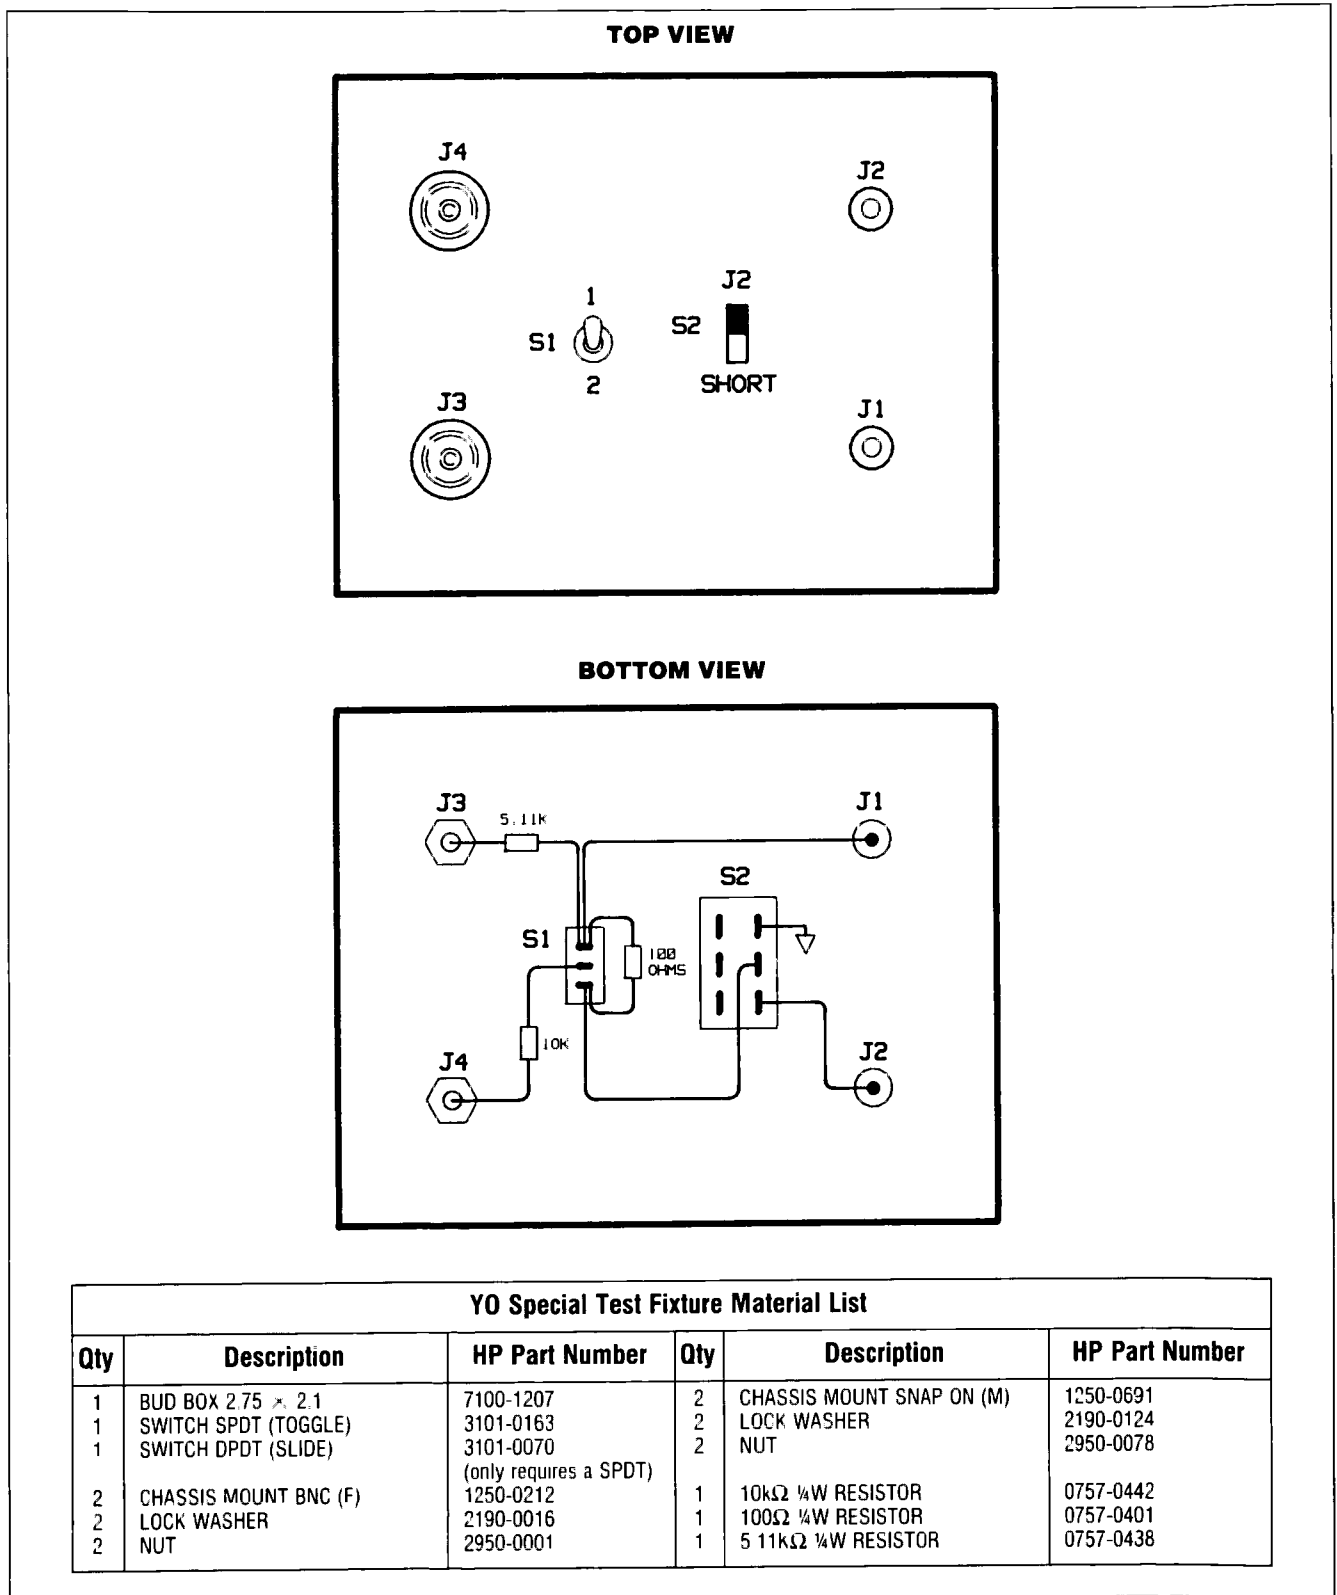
Special Test Fixture Fabrication Instructions (2 of 2)
